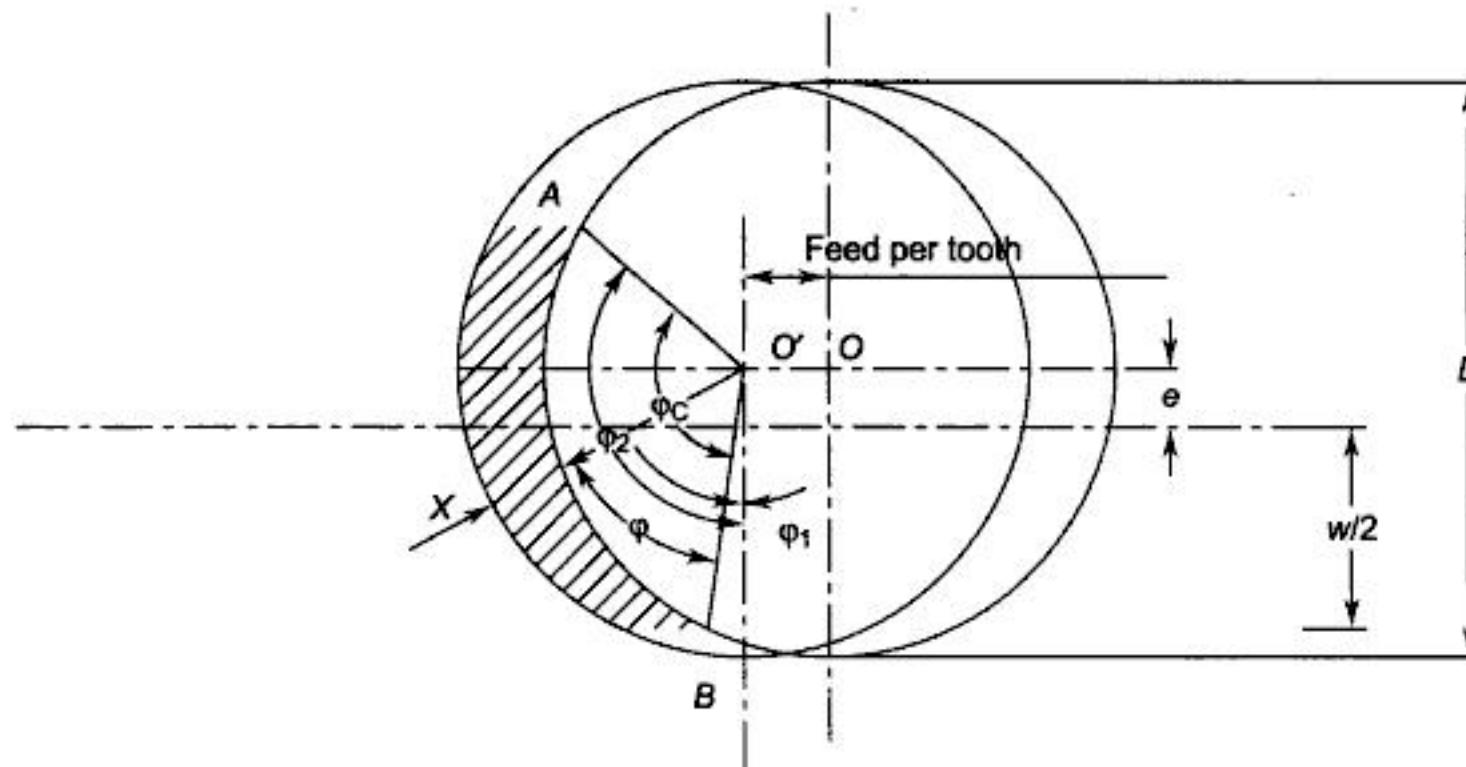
Cross-section of chip produced by milling using a face milling cutter with unsymmetrical cut.
